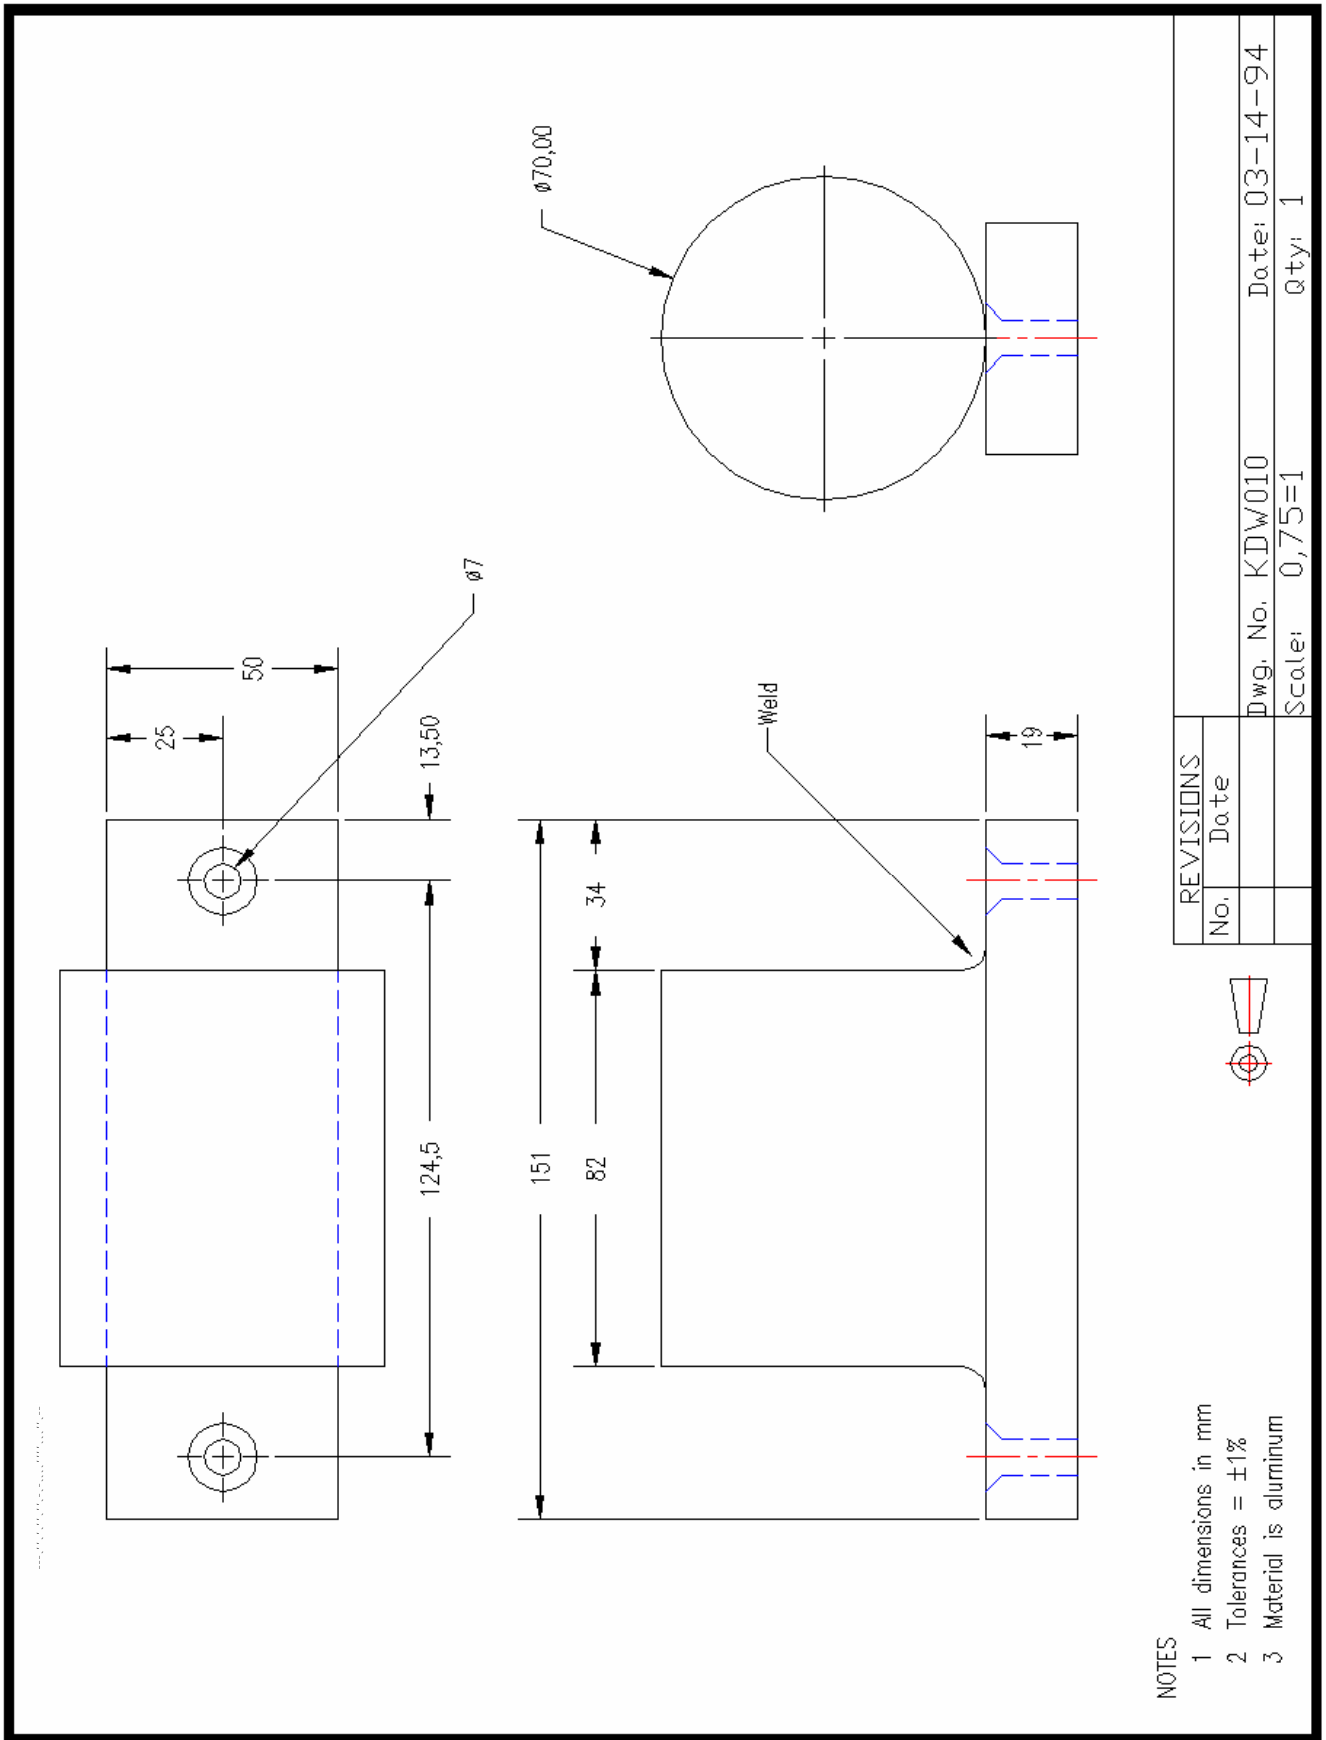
Impactor head for the bone dynamic bending fracture test
